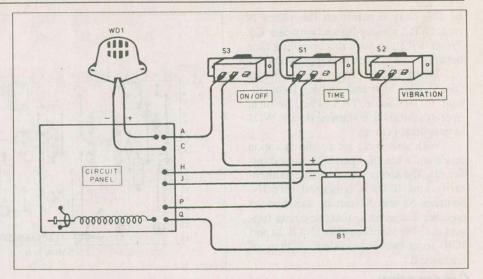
Interwiring from the slide switches, buzzer and battery to the component side of the circuit board.
